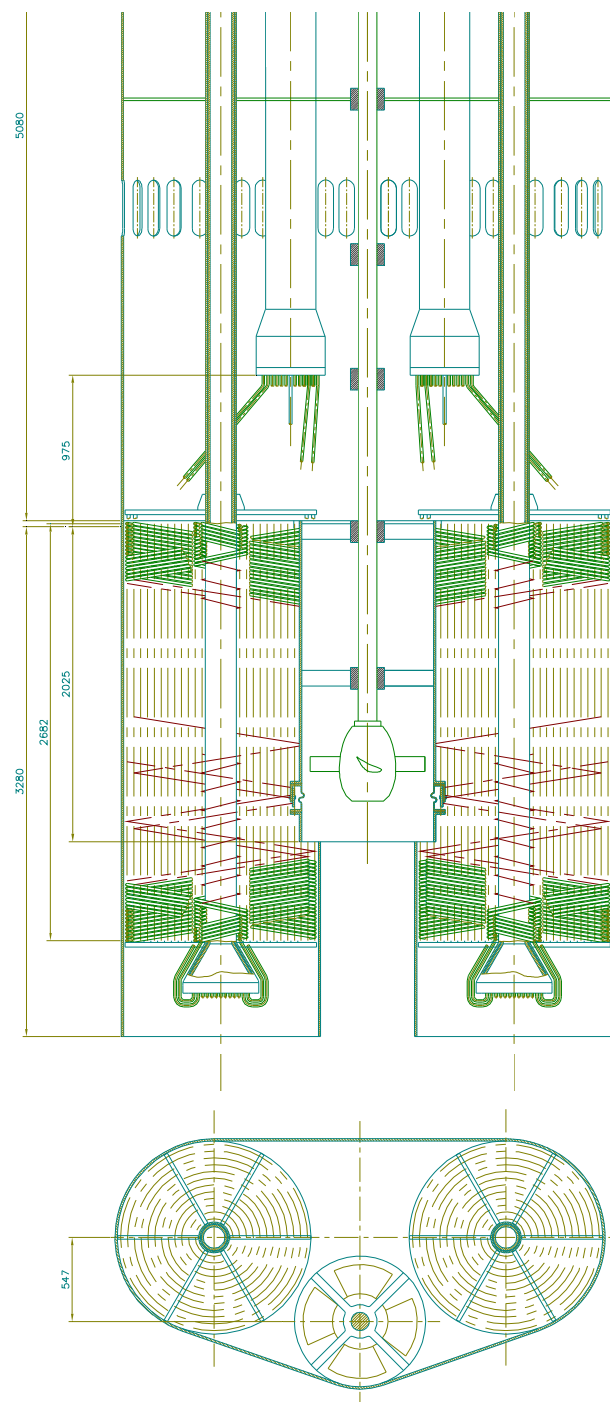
Primary Pump-Steam Generator Assembly (1 Pump and 2 Steam generators)
